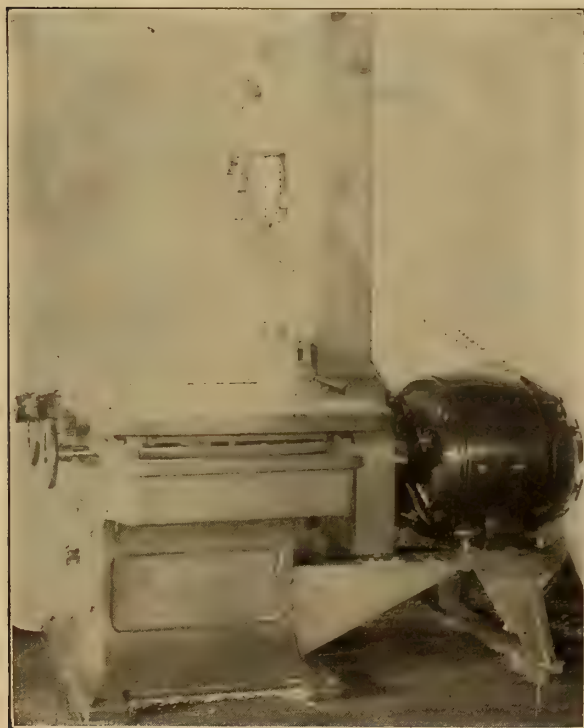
24 IN. BUZZ PLANER, CONNECTED BY GEARS TO GENERAL ELECTRIC CO.'S CE4-5 H.P. D. C. MOTOR, 120 R.P.M.
